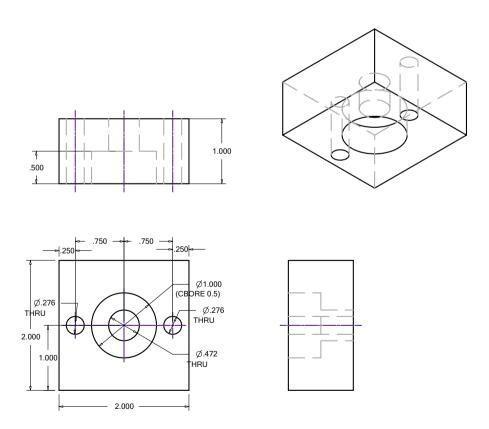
B1 Top and bottom clamp caps. Two caps required. All dimensions given in SAE (inches). Bolt through-holes are loose tolerance 7 mm holes for 6 mm cap bolts.
